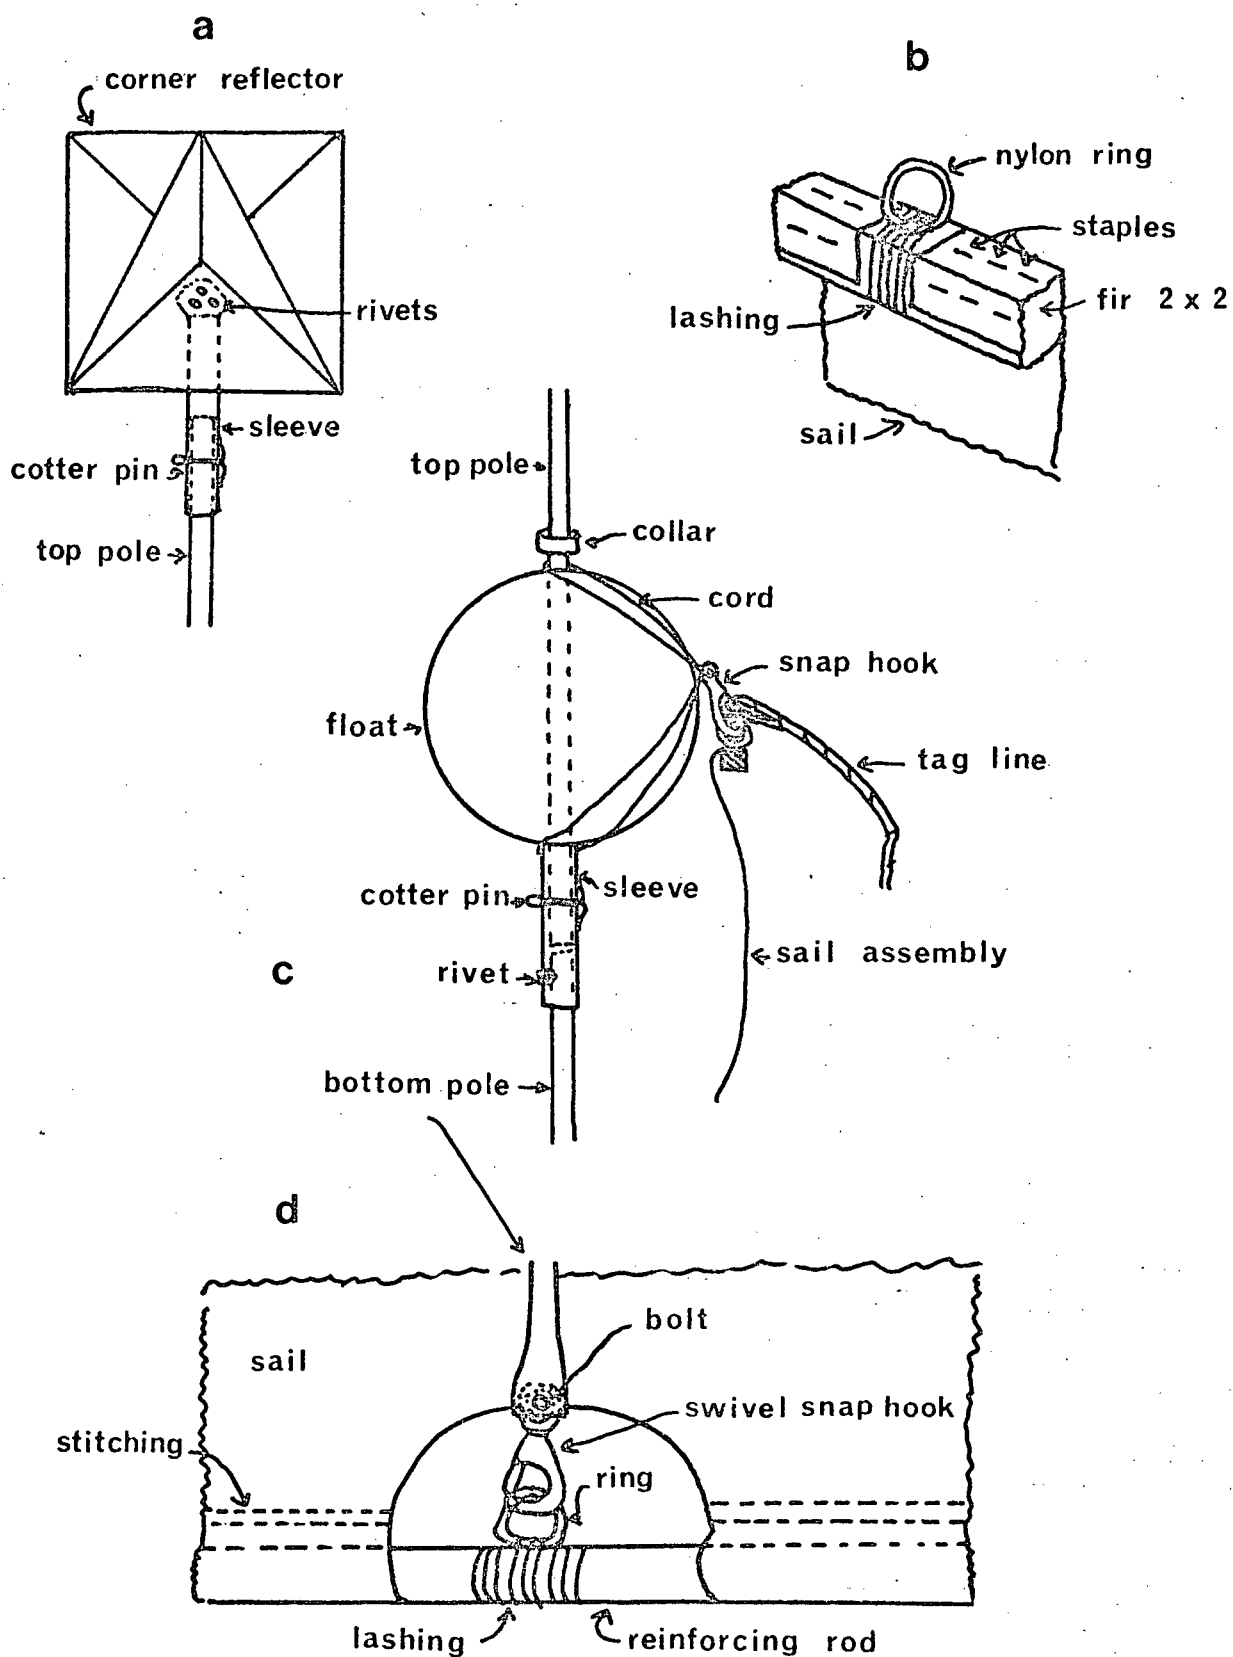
Details of drogue construction. a. Attachment of the radar reflector. b. Top of the sail assembly. c. Float assembly. d. Bottom of the sail assembly.
